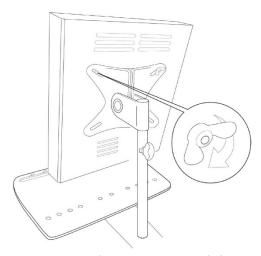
Mounting the LASERNEEDLE Touch device on the trolley
